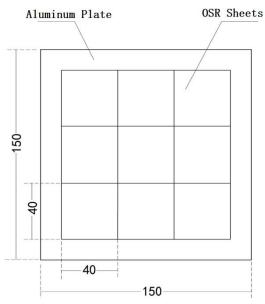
Schematic diagram of thermal vacuum test piece (mm)
